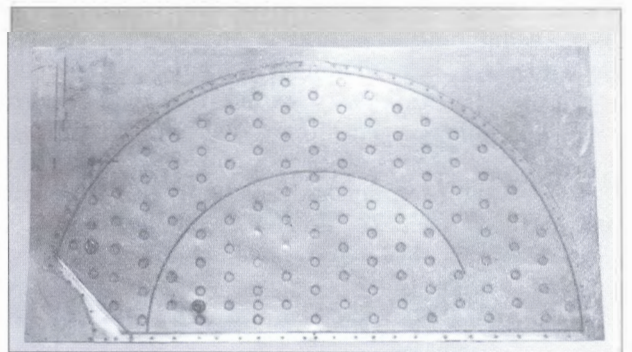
Fragment of the stainless steel evaporator bottom of milk refrigerator with a diameter of 1000 mm and thickness of 2 mm, the built-up sheet being 1 mm thick
